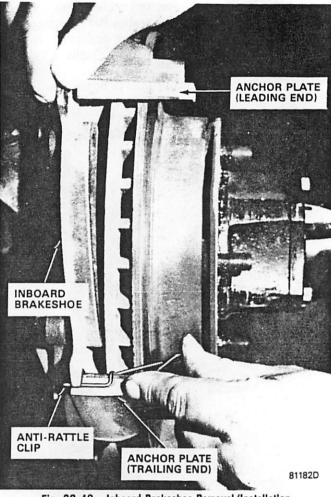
G-49 Inboard Brakeshoe Removal/Installation
